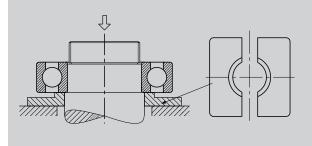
Dismounting of Inner Ring by using Hydraulic Press
